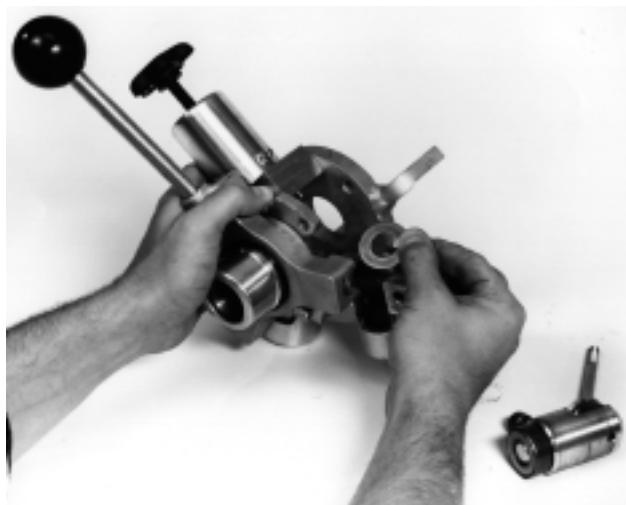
Insert 4 spacers for $\frac{1}{2}$ " cable
